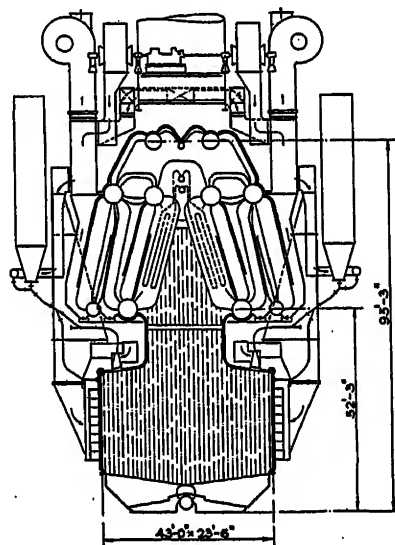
CROSS-SECTION NEW BOILER UNITS
